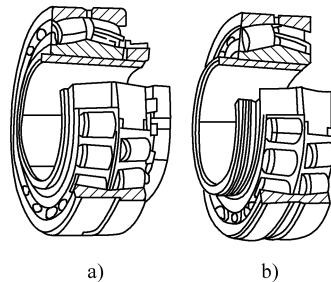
Spherical roller bearings with adapter sleeves and withdrawal sleeves
